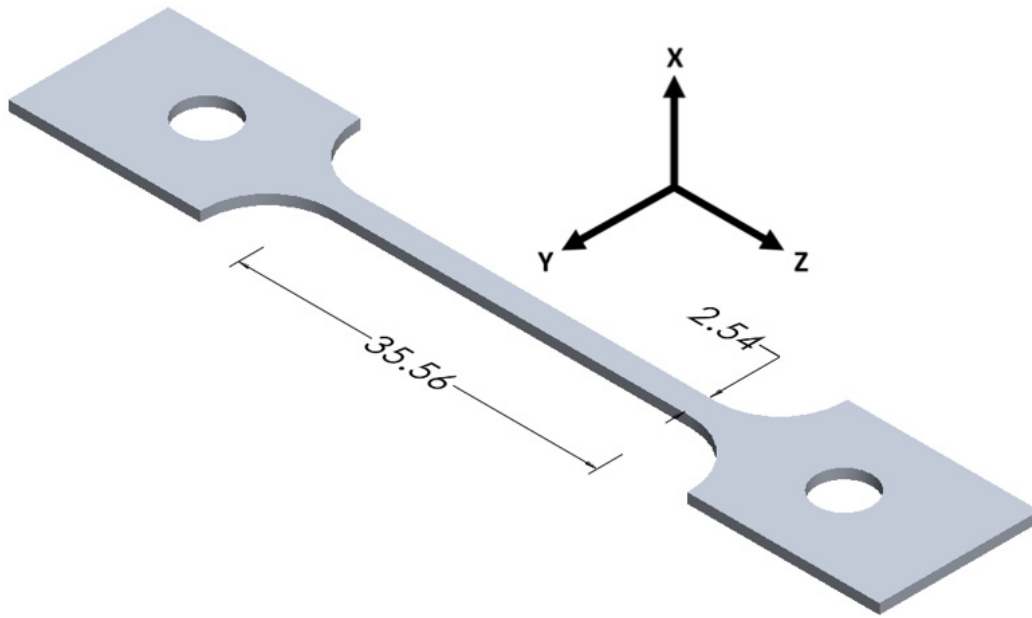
Isometric view of a creep specimen. All dimensions are in mm.
